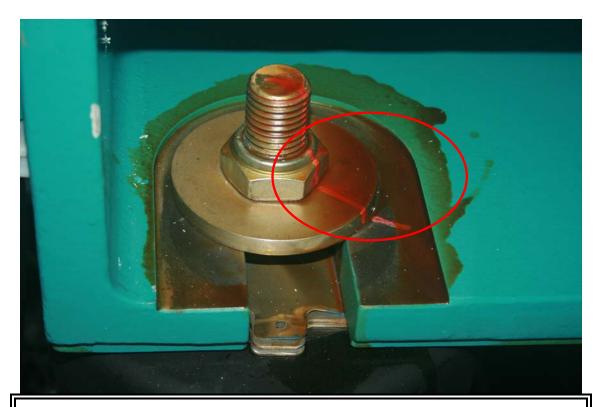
Left front generator mount. Elastomeric insert bolting moved.
